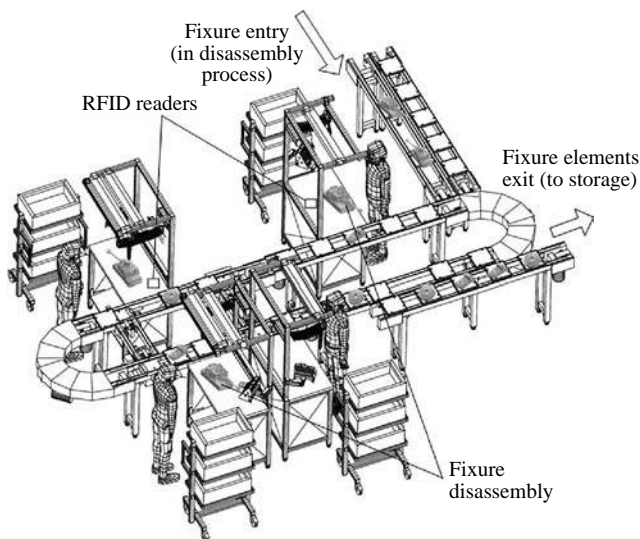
Concept solution of RFID system in fixture assembly processFigure 5 Concept solution of RFID system in fixture disassembly process
